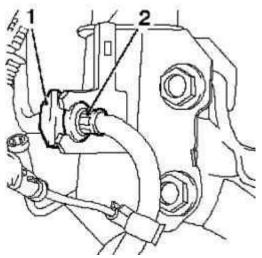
Removing the brake hose: 1 - clip 2 - brake hose
